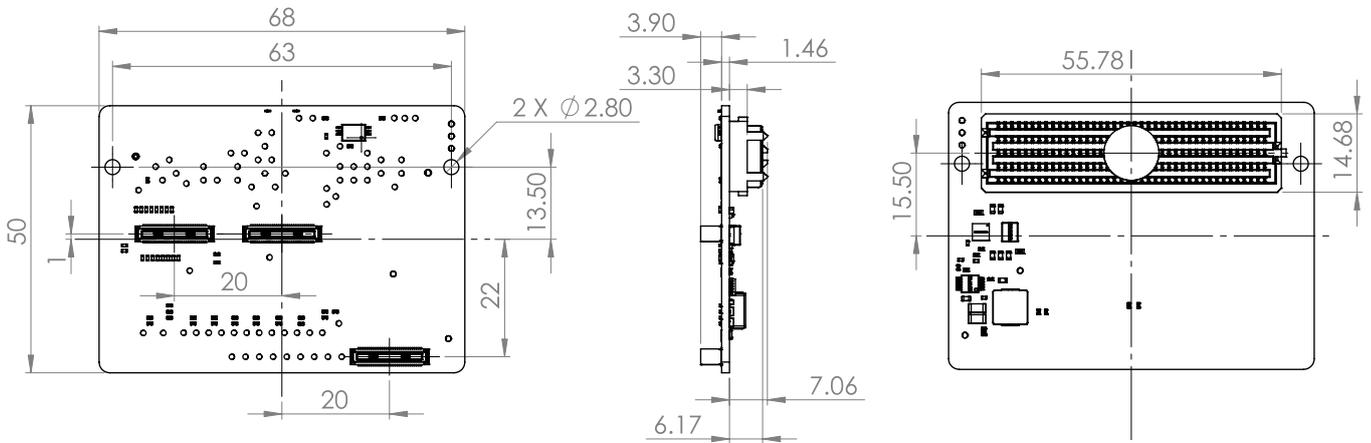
Technical Drawing of FPA-ABC/XX1-V1
